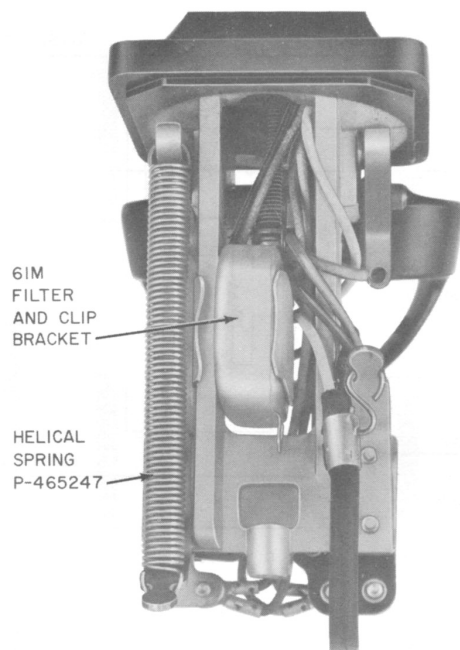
Assembly of Filter on G-Type Handset Mounting
